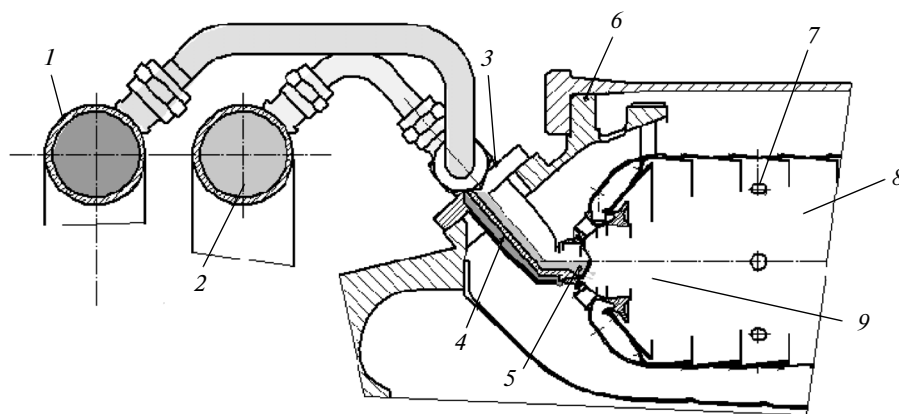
Combustion chamber with steam admission into the burning zone through the fuel nozzle. (1) Steam header, (2) fuel header, (3) steam–fuel nozzle, (4) steam channel in the nozzle, (5) gaseous fuel channel in the nozzle, (6) combustion chamber sealed casing, (7) secondary air holes, (8) flame tube, and (9) flame tube front device swirler.
